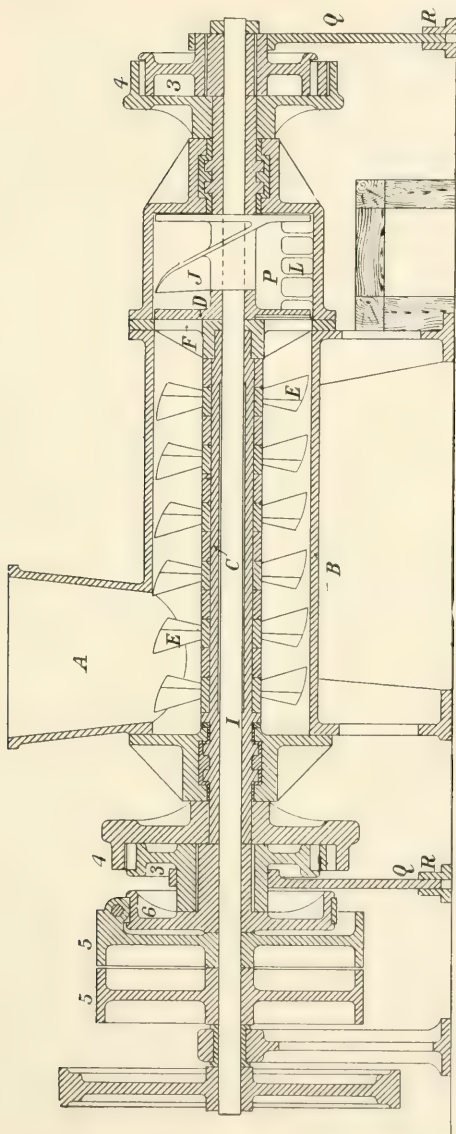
Hall-Bainbridge Peat Machine—Sectional Elevation.
